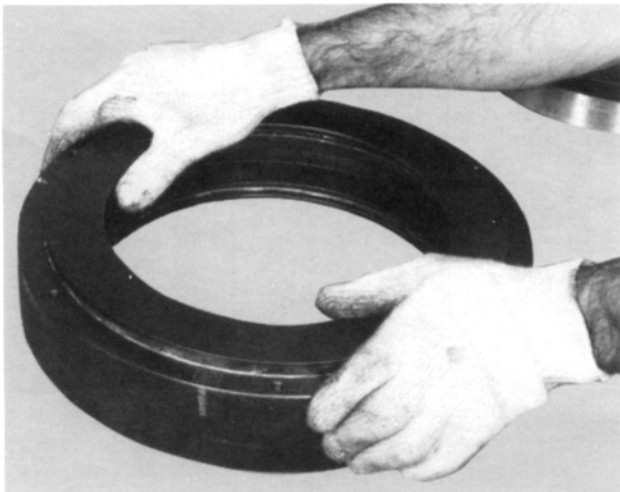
Lubricating O-Ring Seals (Piston Shown)
